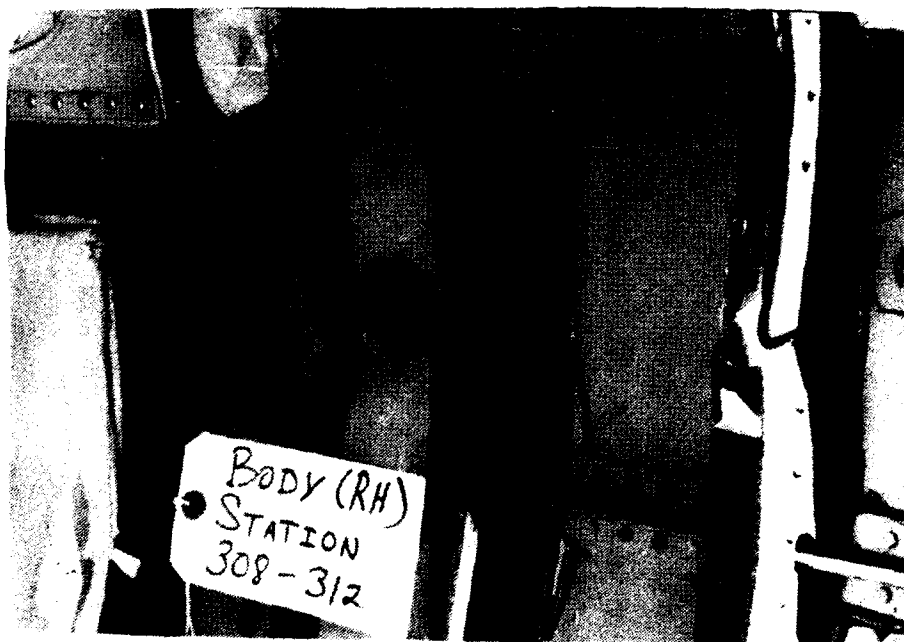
POST TEST INTERIOR FUSELAGE, WALL
